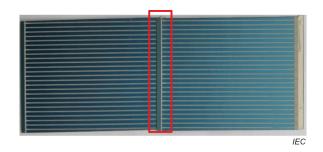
Picture of a final specimen slice cut from the bonded assembly
